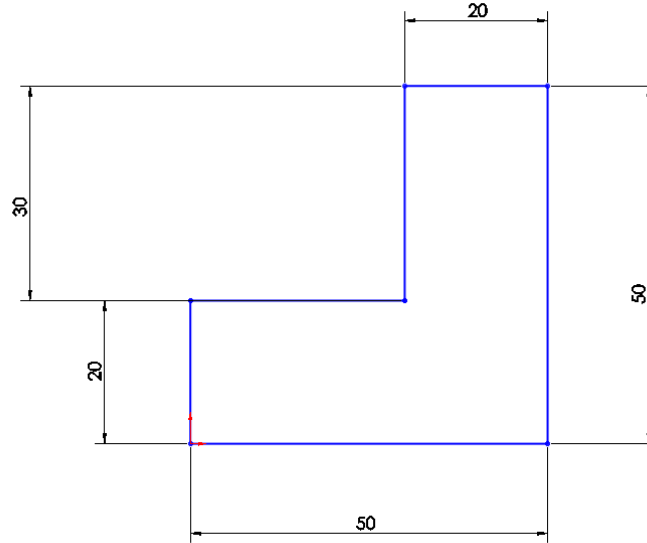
Dimension of alignment plate for compression test. Thickness of 3.95mm. All dimensions in millimeters.
